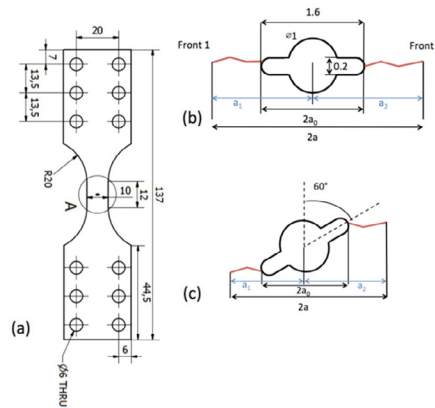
Specimen and notch geometries: (a) specimen, (b) notch for base metal and N90-welded specimen, (c) notch for N60-welded specimen
